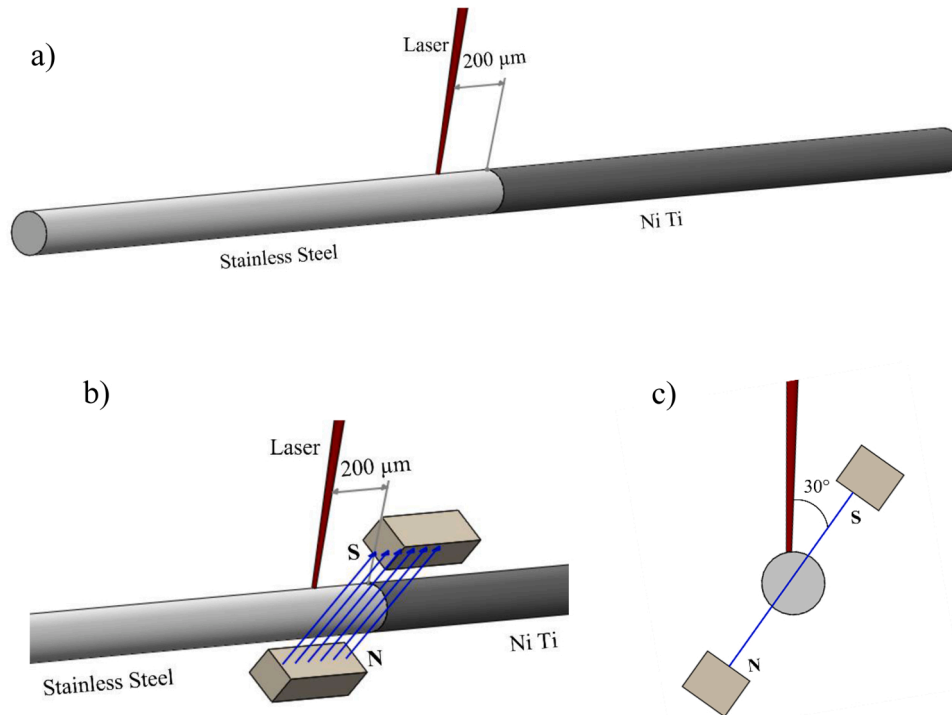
a) nMFS welding arrangement, b) MFS welding arrangement and c) MFS welding arrangement side view.
